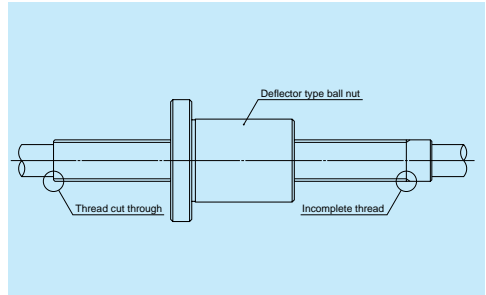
•1 Shaft end of a deflector recirculation system ball screw
